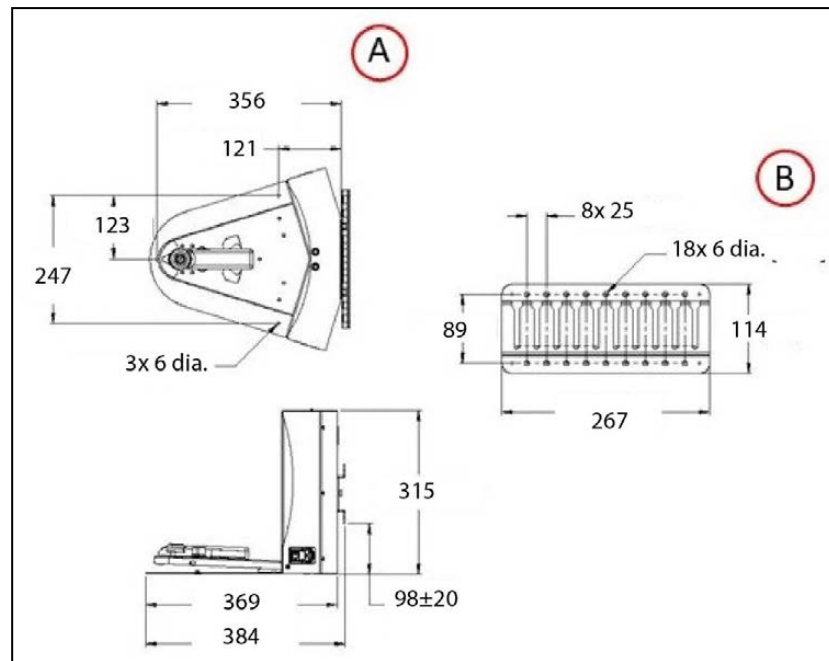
Docking Station, (A) Wall Mount and (B) Wall Mount Bracket (units are mm)
